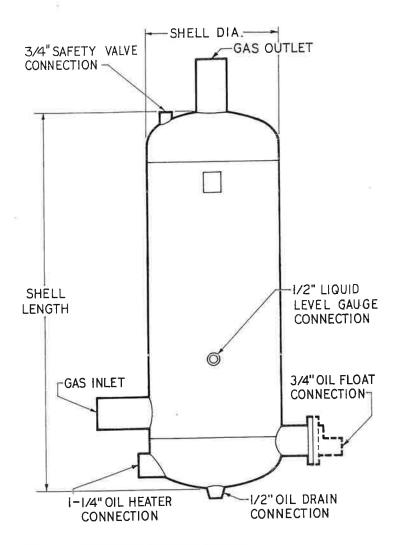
DIMENSIONAL OUTLINE DRAWING
